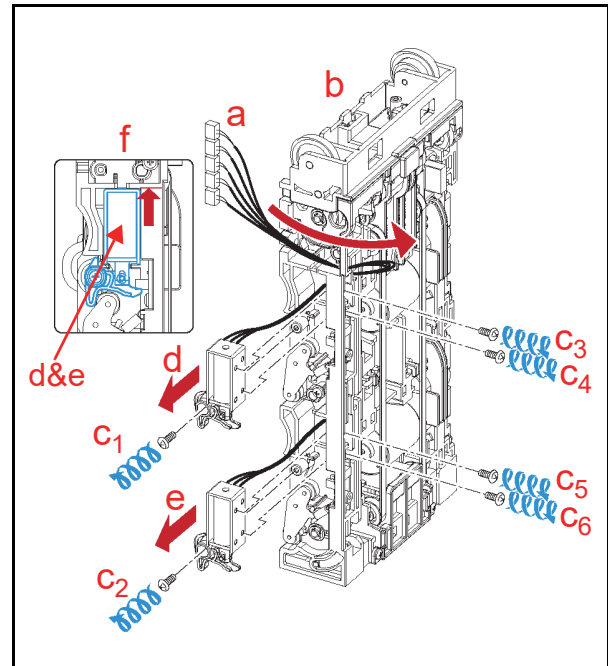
Upper & Lower Flapper Pusher Lever Solenoid Removal
